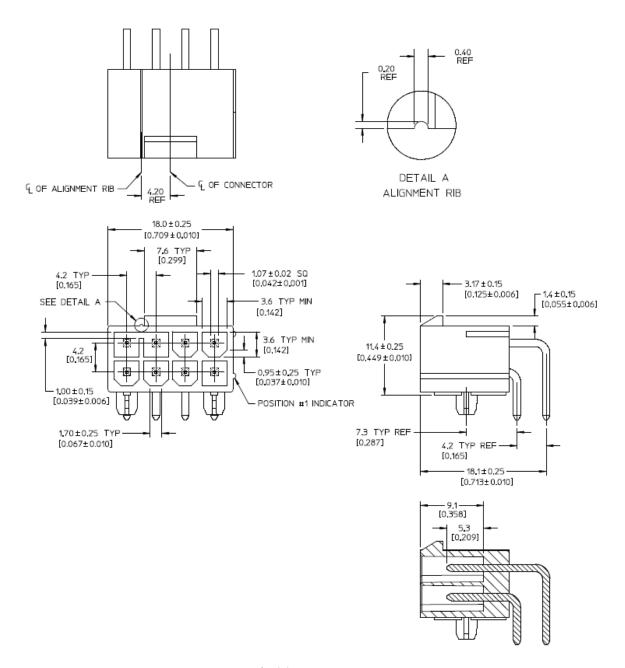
2 x 4 R/A Thru-Hole Receptacle Drawing
